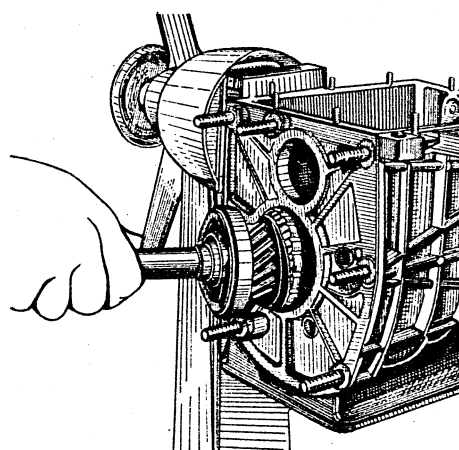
Removing the Clutch Shaft from Gearbox Housing
